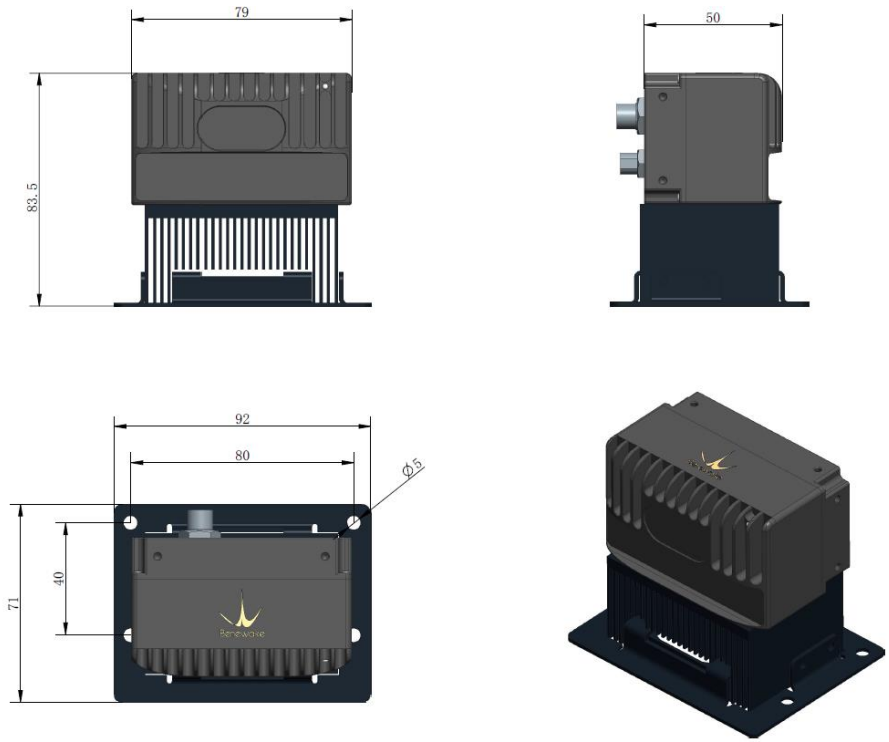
Dimension and Installation Drawing of CE30-A LiDAR Components - Heat Sink
